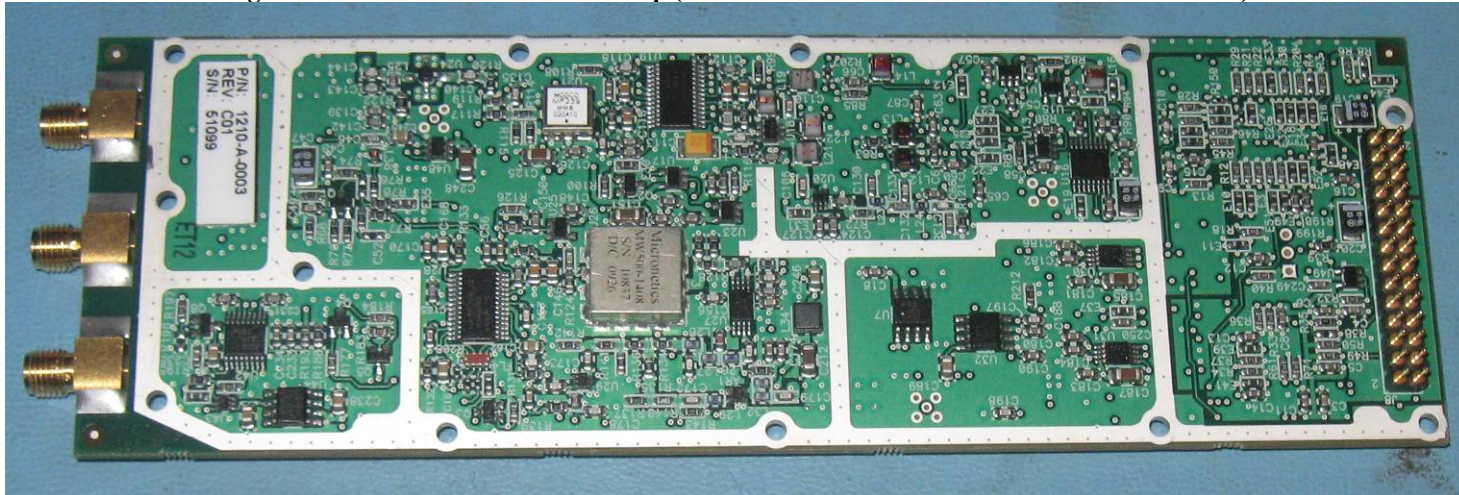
1210-A-0003 RF Module Bottom (Part of the BGAN 1 and BGAN 2 Channel Cards)
